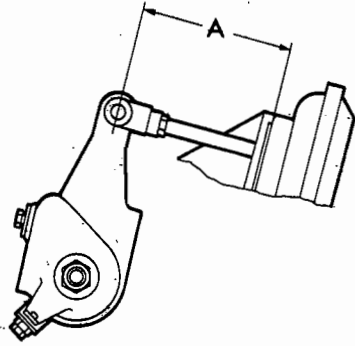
ADJUSTING BRAKE CHAMBER PUSH-RODS
